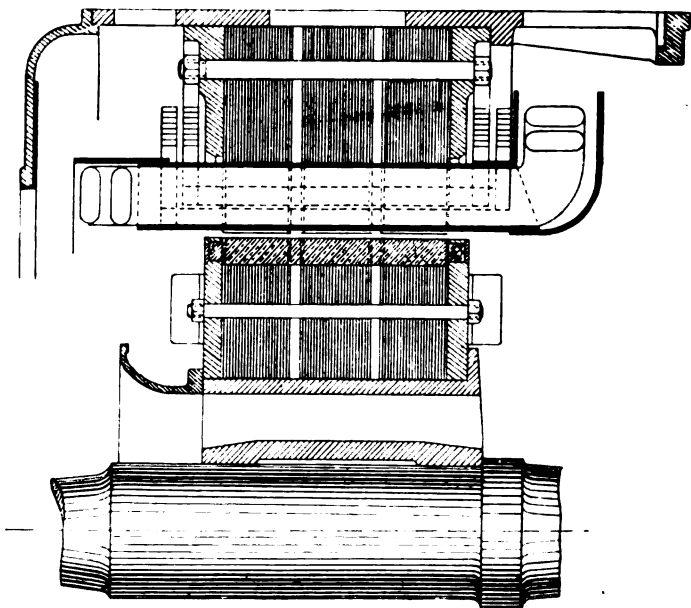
HIGH-SPEED SINGLE-PHASE INDUCTION MOTOR, 520 H.P.
